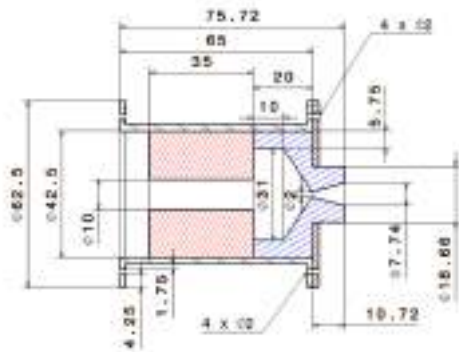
CAD model section of thrust chamber (dimensions in mm). In blue the conical nozzle, in red the fuel grain, in black the external case, in brown a closing flange (wall thickness flange and case: 2 mm).
